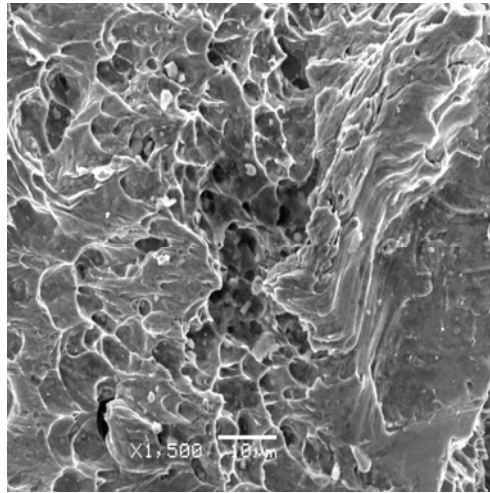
Microfractography of a joint welded using GMAW, fracture in the weld, 1500x times magnified
